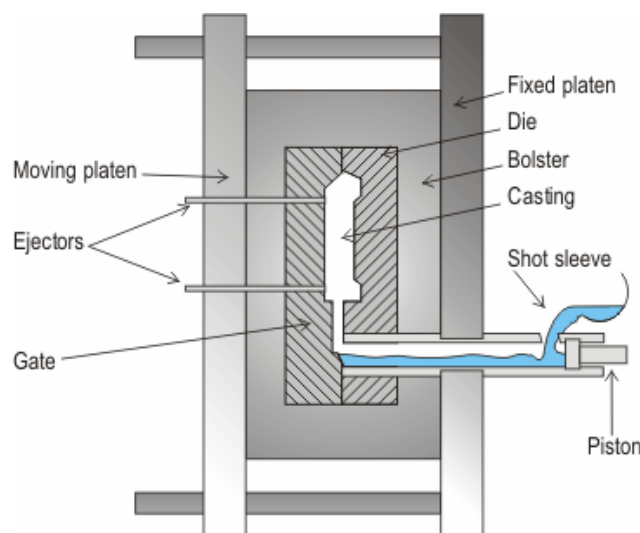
A schematic view of high-pressure die casting.<sup>66</sup>
